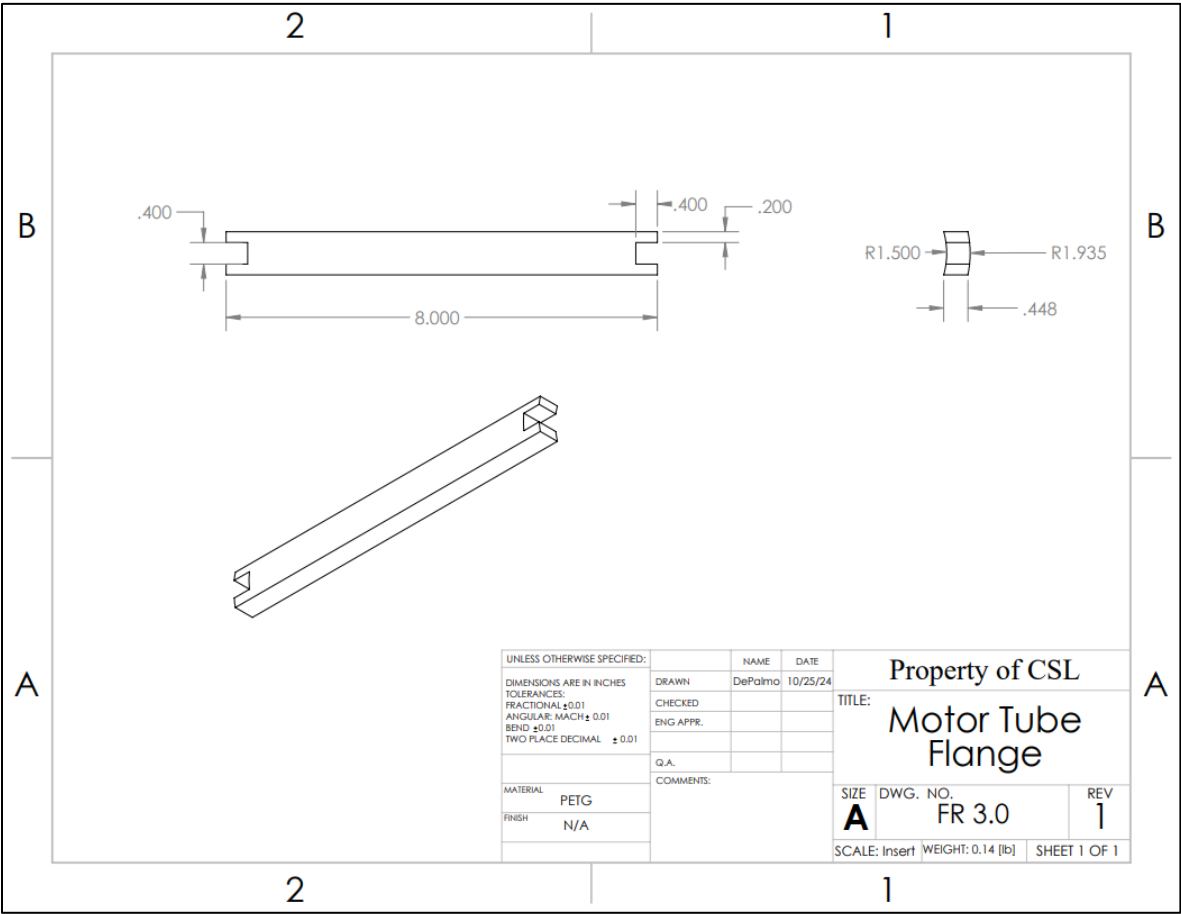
Dimensioned SolidWorks Drawing of the Motor Retainment Flange.
